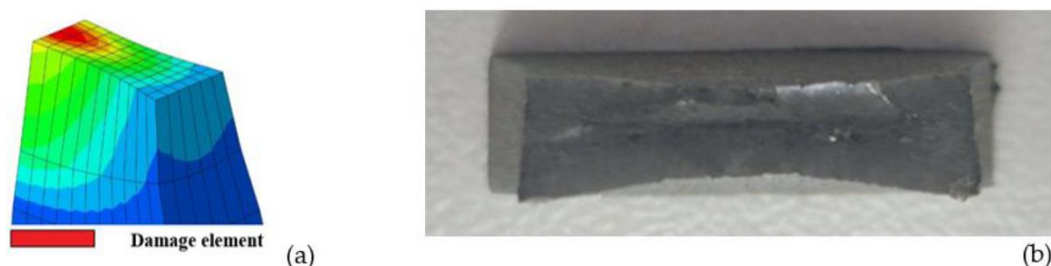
The void volume fraction in cross section of specimen in salt chamber: (a) at crack initiation; (b) picture of cross section of specimen after fracture.
